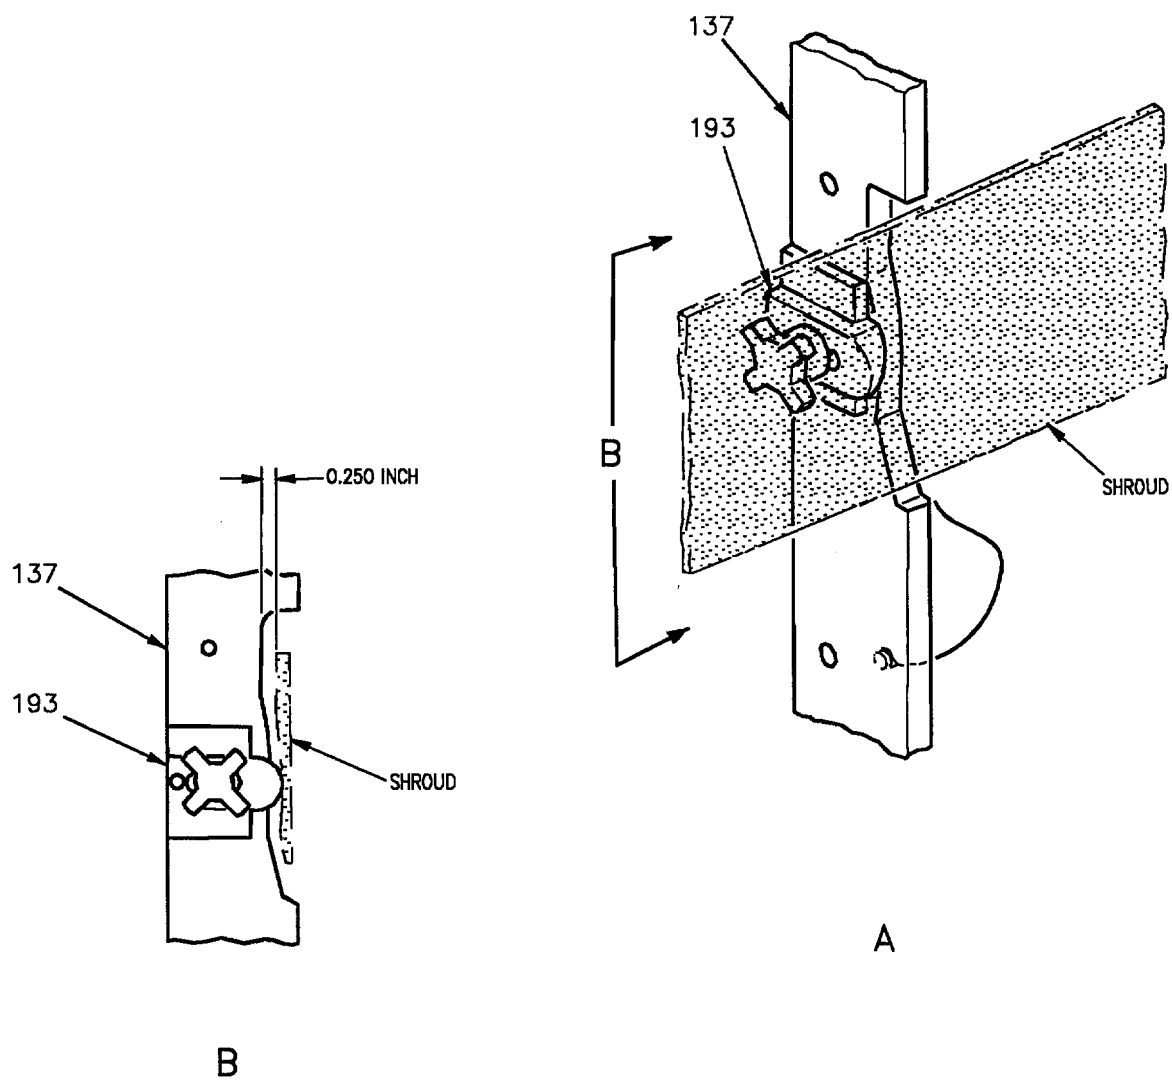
Moldline Contour and Inboard Trim Inspection (Sheet 2)
